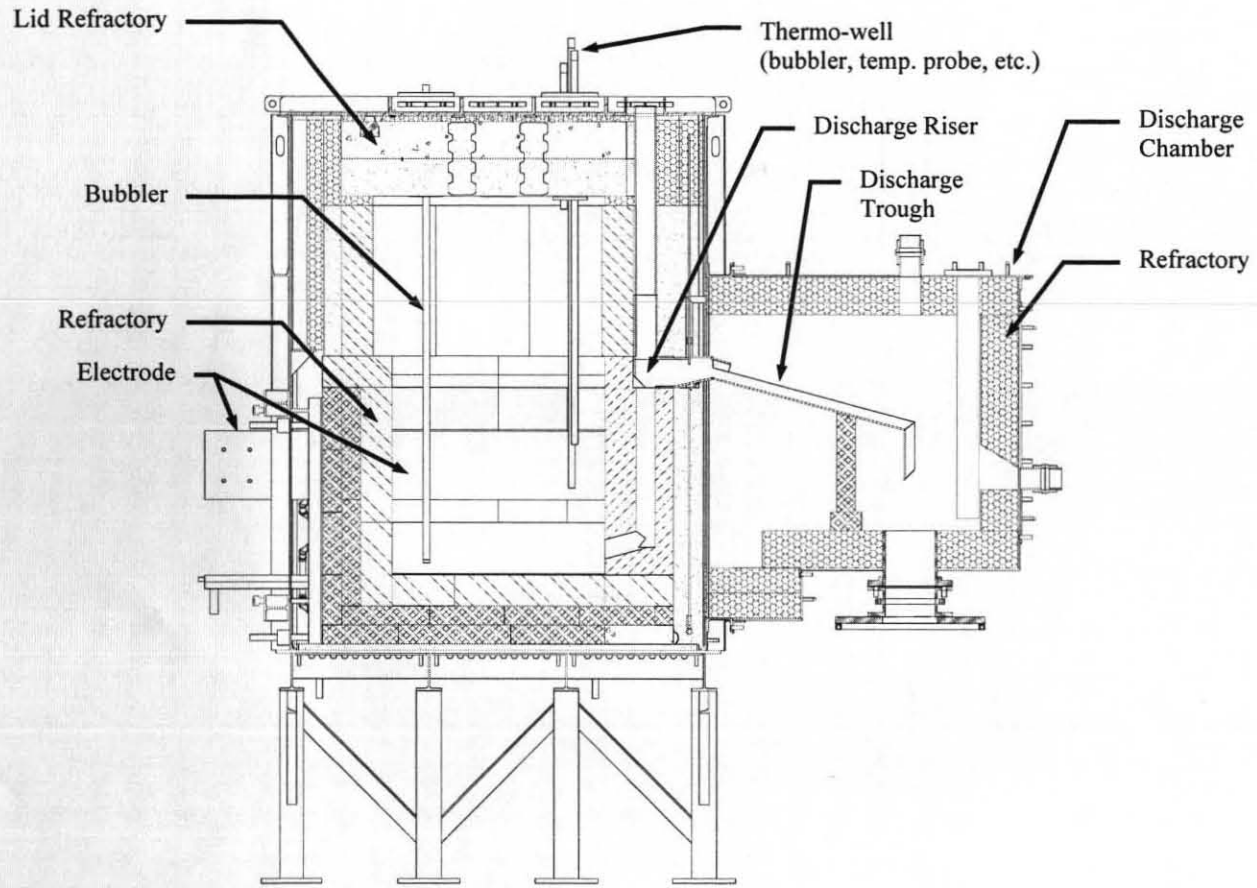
Cross-section of the DM1200 melter through the discharge chamber.
